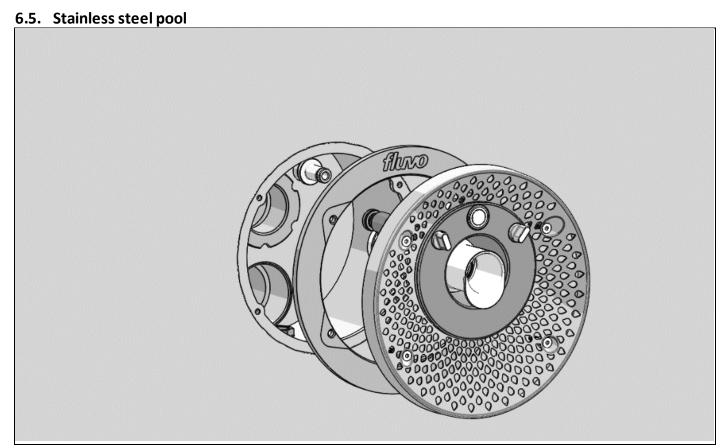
Insert the nozzle head and screw it on (illustration shows stainless steel design with tile or spacing ring).
